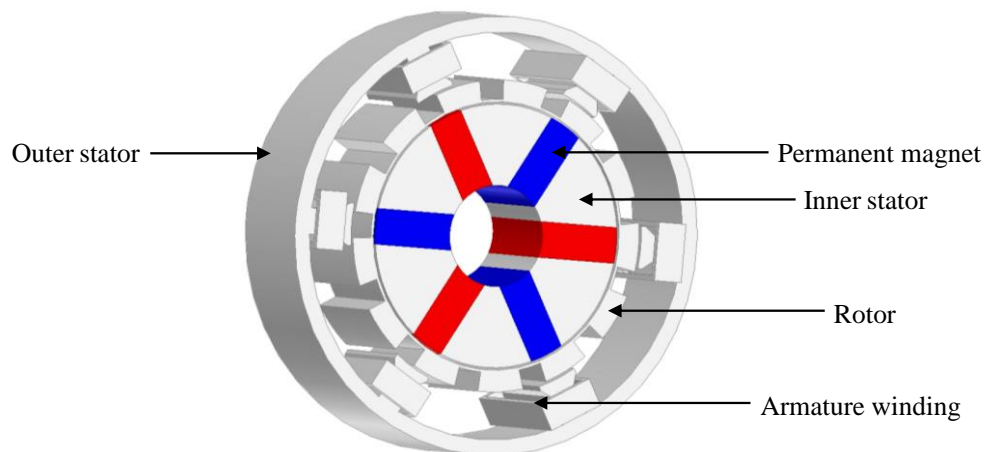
Illustration of the proposed magnetically geared SFPM machine.
